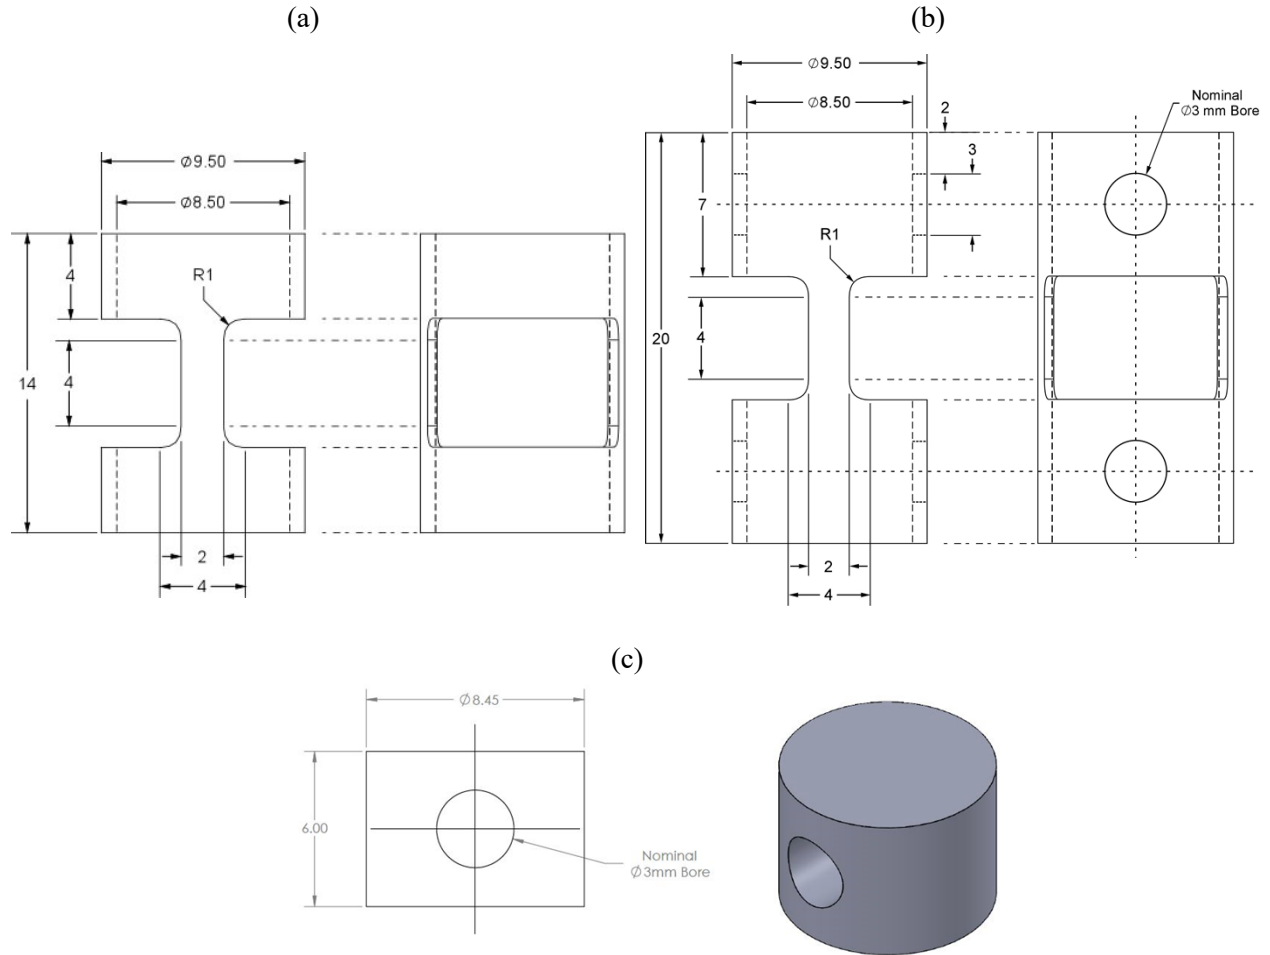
Design illustrations of the initial and modified dual-gauge axial specimen for the thin wall tube of C26M2. (a) initial design, (b) modified design and (c) plug for modified design.
